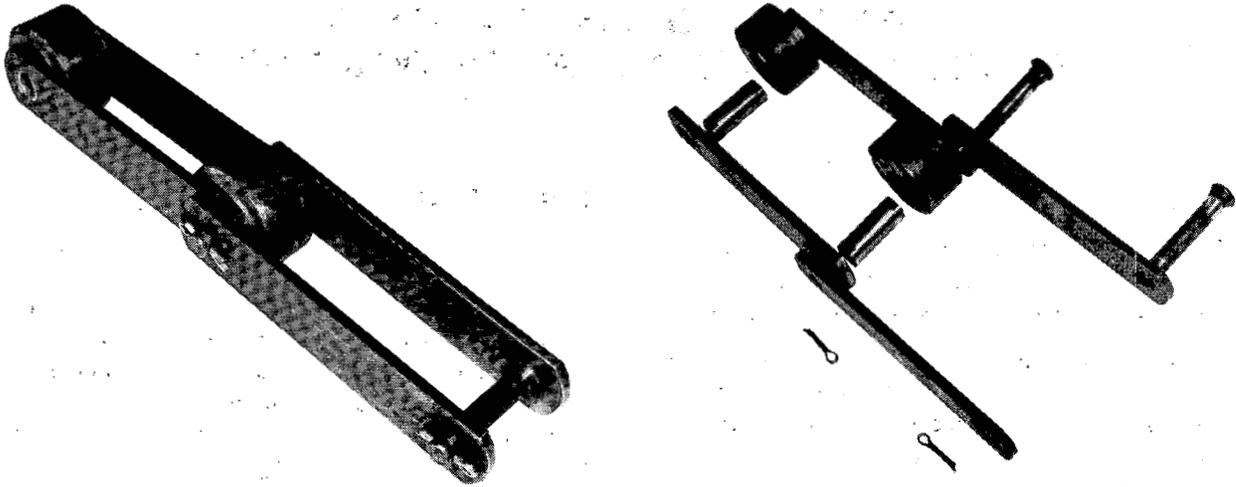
STEEL ROLLER TYPE CONVEYOR CHAINS
